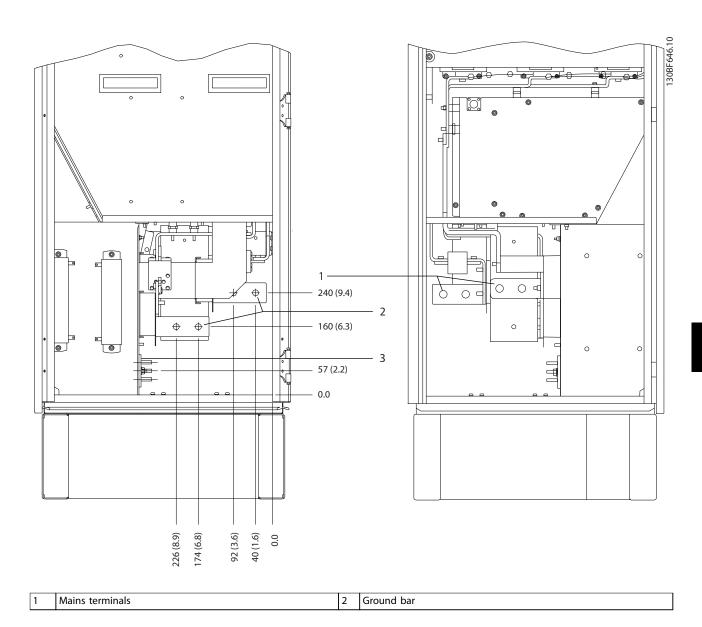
Terminal Dimensions for F10–F13 Rectifier Cabinet, Side View
